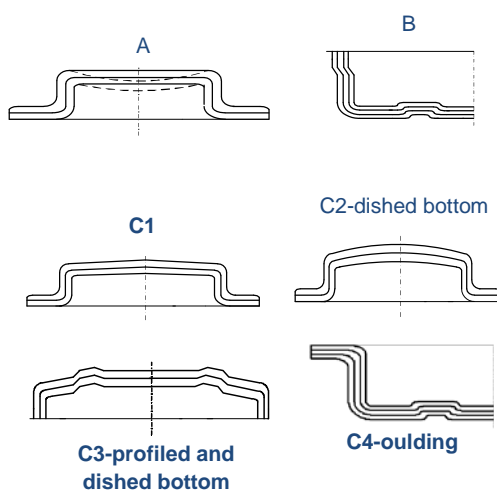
Hardening by profiling: A - deformation plane surfaces; B - bumps surfaces due to wall thickening; C1 - C4 - hardening by profiling
